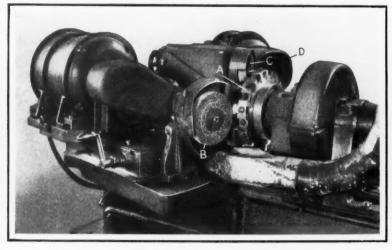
Grinding the Blades of a Cutter-head for a Spiral Bevel Gear Generator by the Use of Three Grinding Wheels
